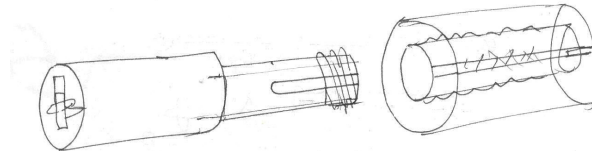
Sketch of an assembly 'handle' in the embodiment stage
